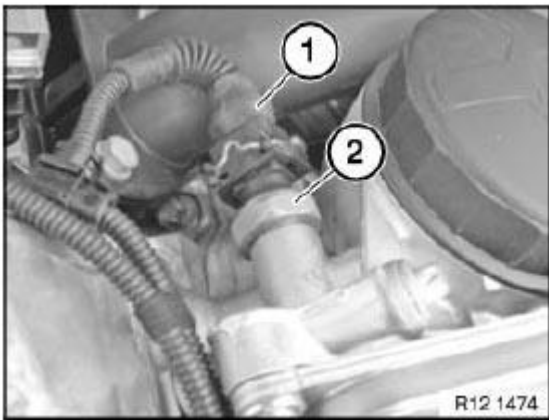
Identifying Plug Connection On Oil Pressure Switch
